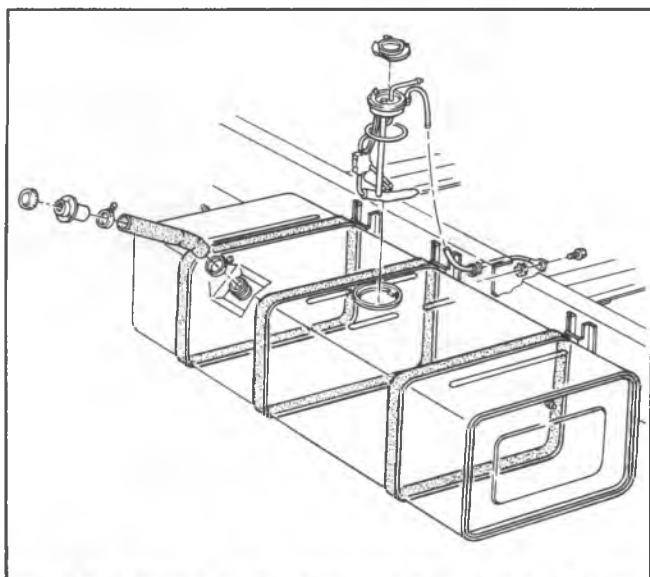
Fuel Tank (50 Gal.), Meter and Filler Neck—P30 Model
